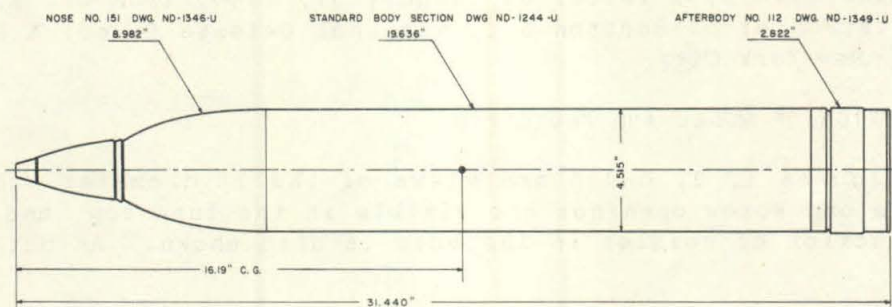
OUTLINE DRAWING OF 4.5" H.E. ROCKET, T38E3
